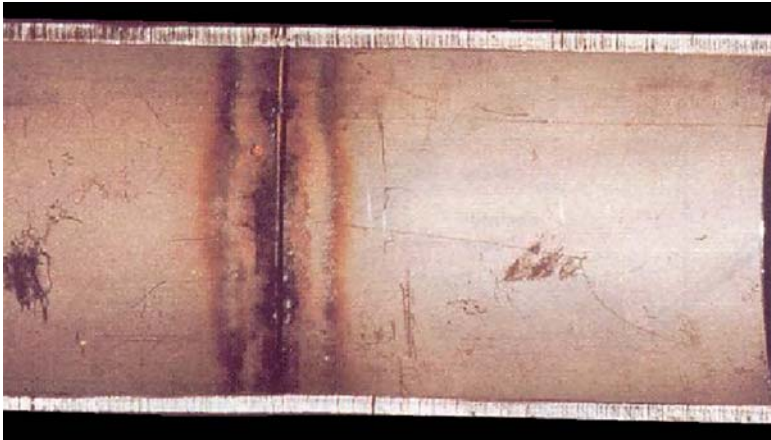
Crevice in weld because both tube ends are not sufficiently pushed together. (Eastwood et al., 1993).
